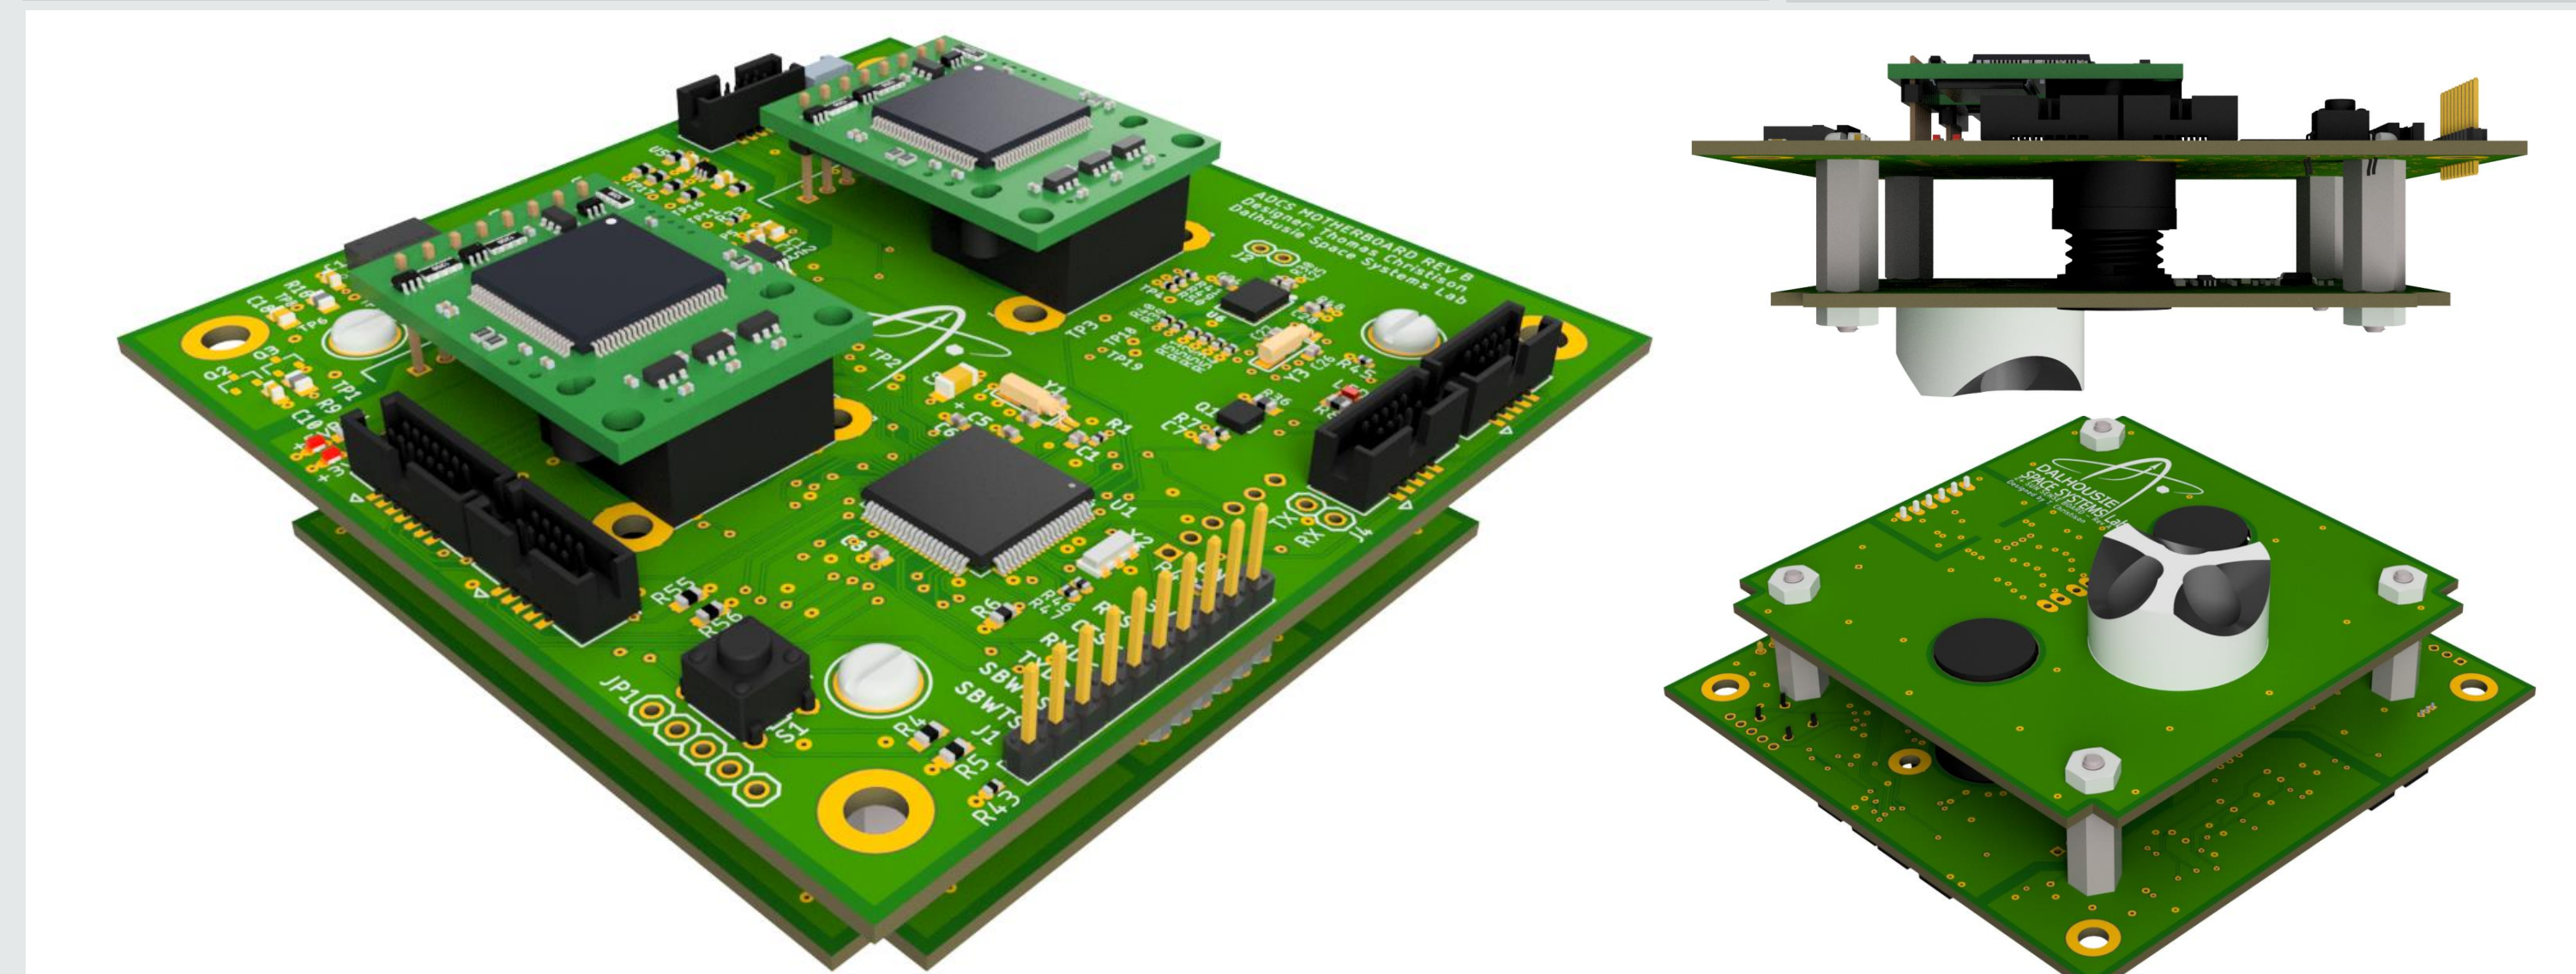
ADCS Motherboard/Z+ Sun Sense Assembly from top view (left), side view (top-right), and bottom view (bottom-right).
